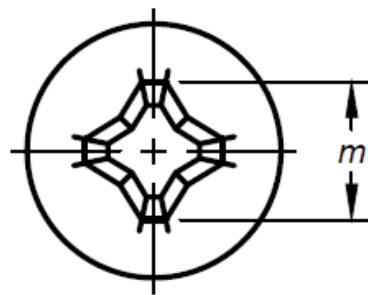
CROSS RECESSED WAFER HEAD DRILLING SCREWS
